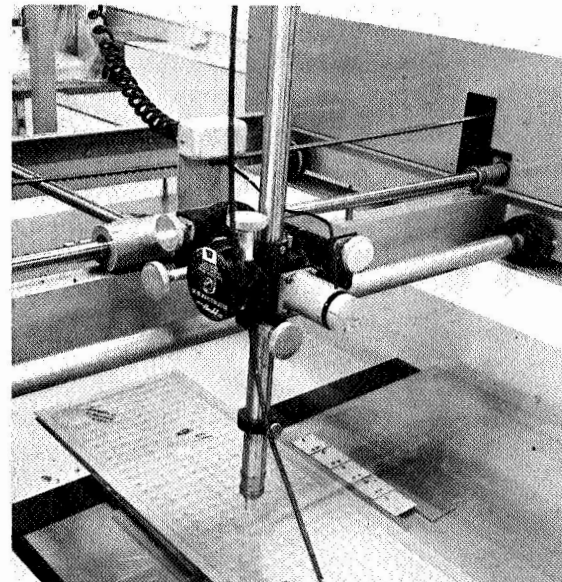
Chart Recorder Used for Ultrasonic Inspection of Welds on Full-Size Panel
